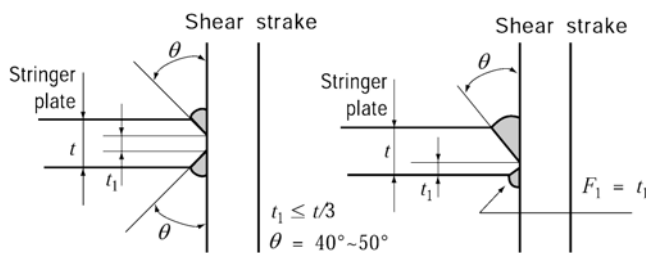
Welding construction of joints between sheer strakes and stringer plates of strength deck
